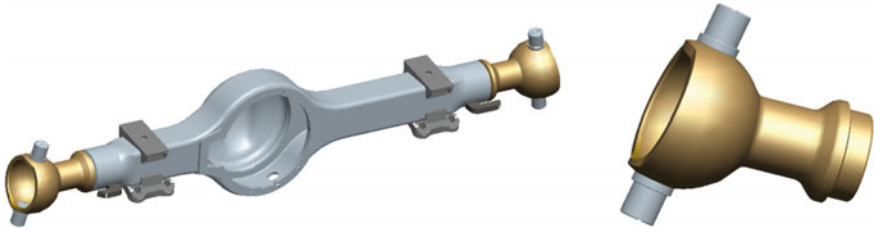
The front drive axle and the spherical head supporting assembly
